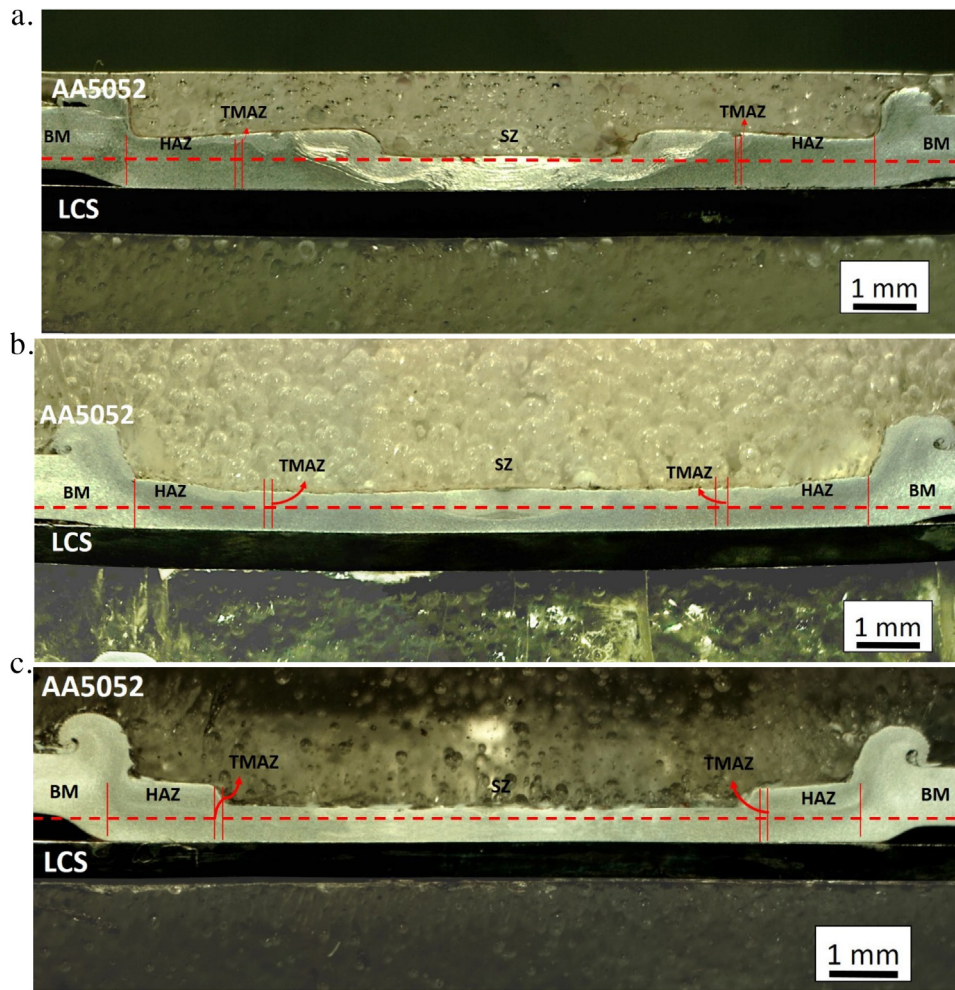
Macrographic appearance of the welded joints: (a) 25-A, (b) 25-B and (c) 25-C.
